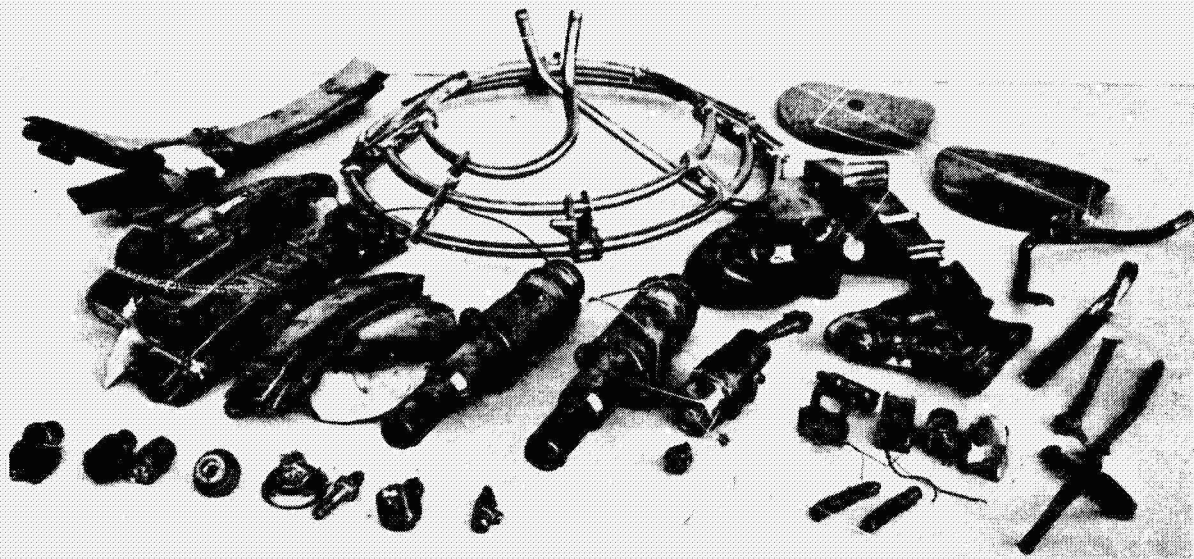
SHe Tank Pieces After Pneumatic Rupture
